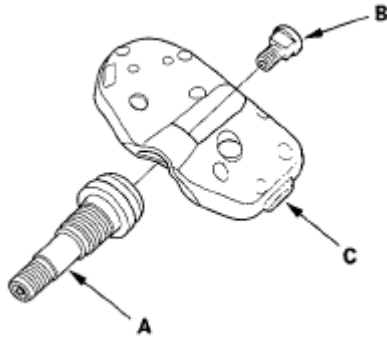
Identifying Valve Stem, Screw, And Sensor-Transmitter
